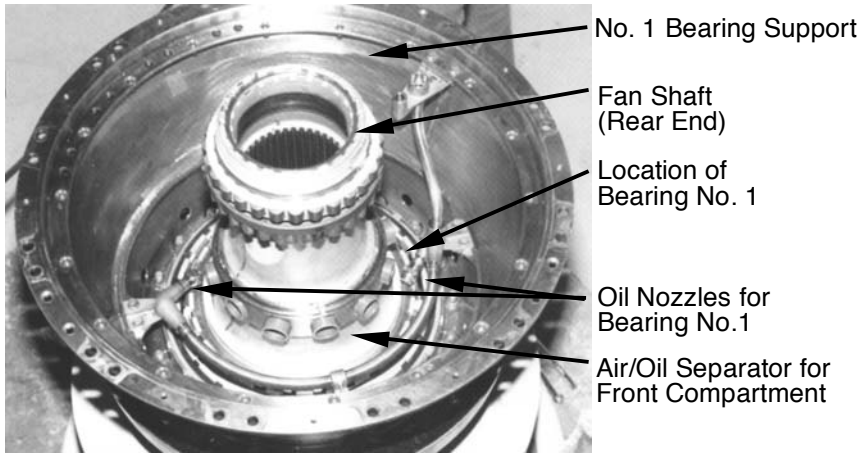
The view from the rear into the front half of the front bearing compartment of a CFM56-3 after its removal from the engine. The oil nozzles for Bearing No.1 and its supply line are visible (LTT)
